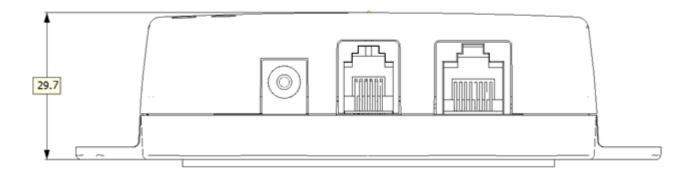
LDSBUS USB Adapter Dimension - Side View
